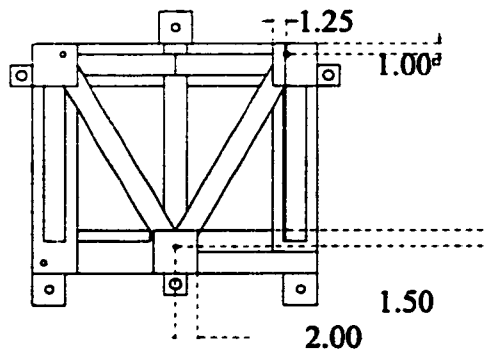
Design drawings for the STM Vacuum Chamber Stand depicting positions of adjustment screw mounts and wheel mounts.
